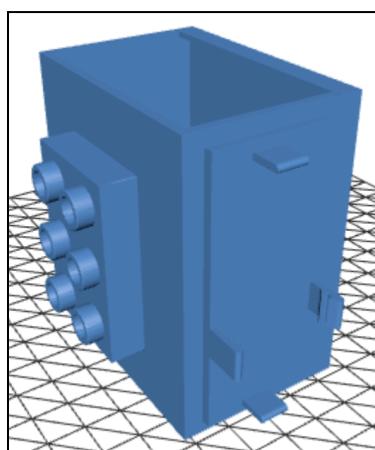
features an enclosure for a 12 V battery pack with a mount for a buck module. The design has a 2x4 duplo block attached to the enclosure with an open end for the battery wires to exit. The side mount holds the buck module in place, allowing the buck module contract with the batteries. The battery pack weight causes the enclosure to struggle staying attached to other duplo blocks. Designing the enclosure to have more duplo pegs can help fix this.
